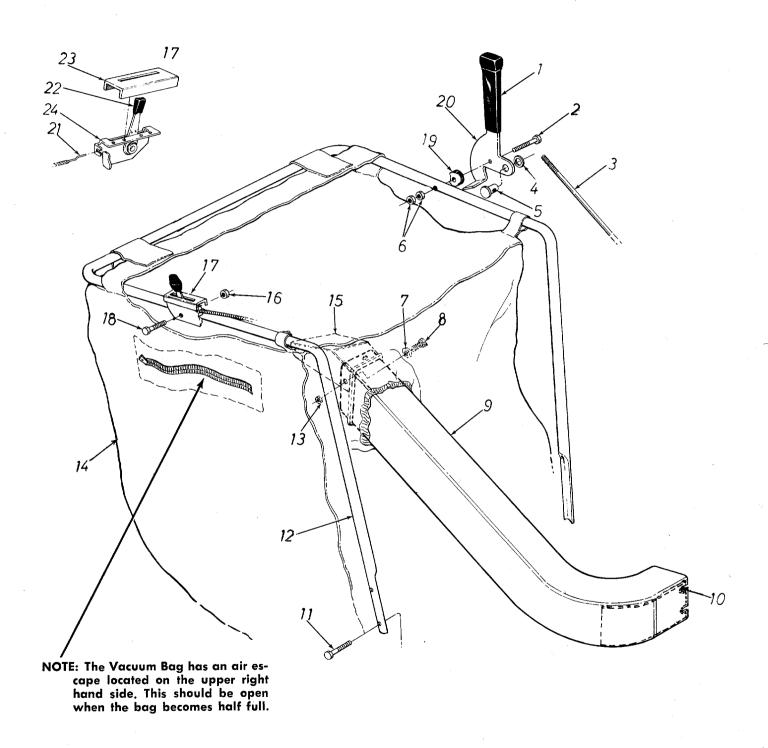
EXPLODED VIEW OF UPPER HANDLE
